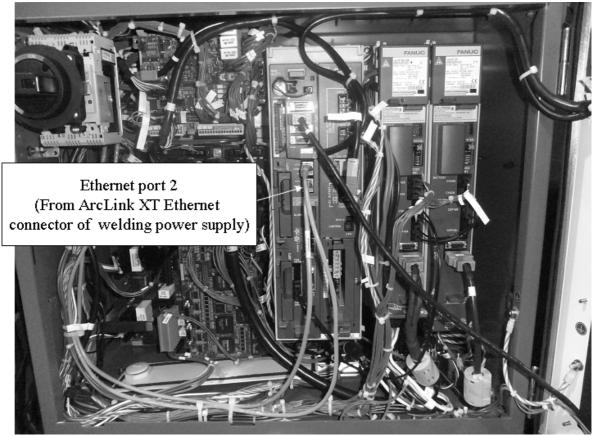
(j) Connection interface for R-30iB Controller of ROBOWELD iC/H (Power Wave i400)
